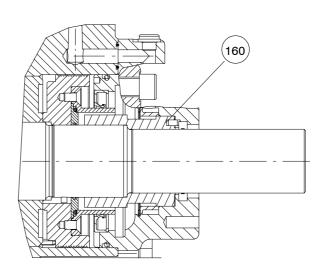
shows a sectional view of the compressor block. A shaft seal of the slide type, Fig. 4.7, pos. 160, is mounted at the shaft end (driving shaft) of the male rotor.
